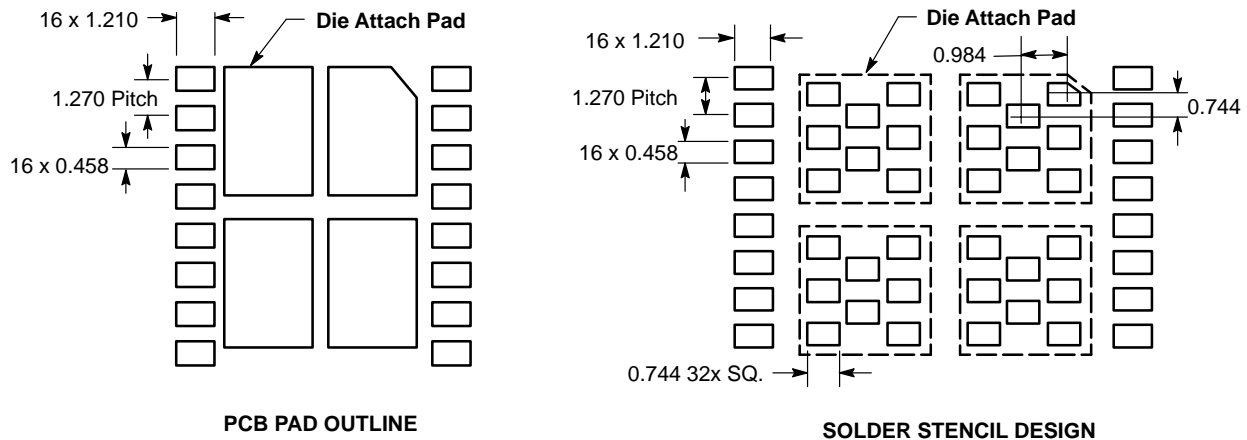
Solder Stencil Design Illustrating How Stencil Openings are Divided into an Array for Large Die Pads
